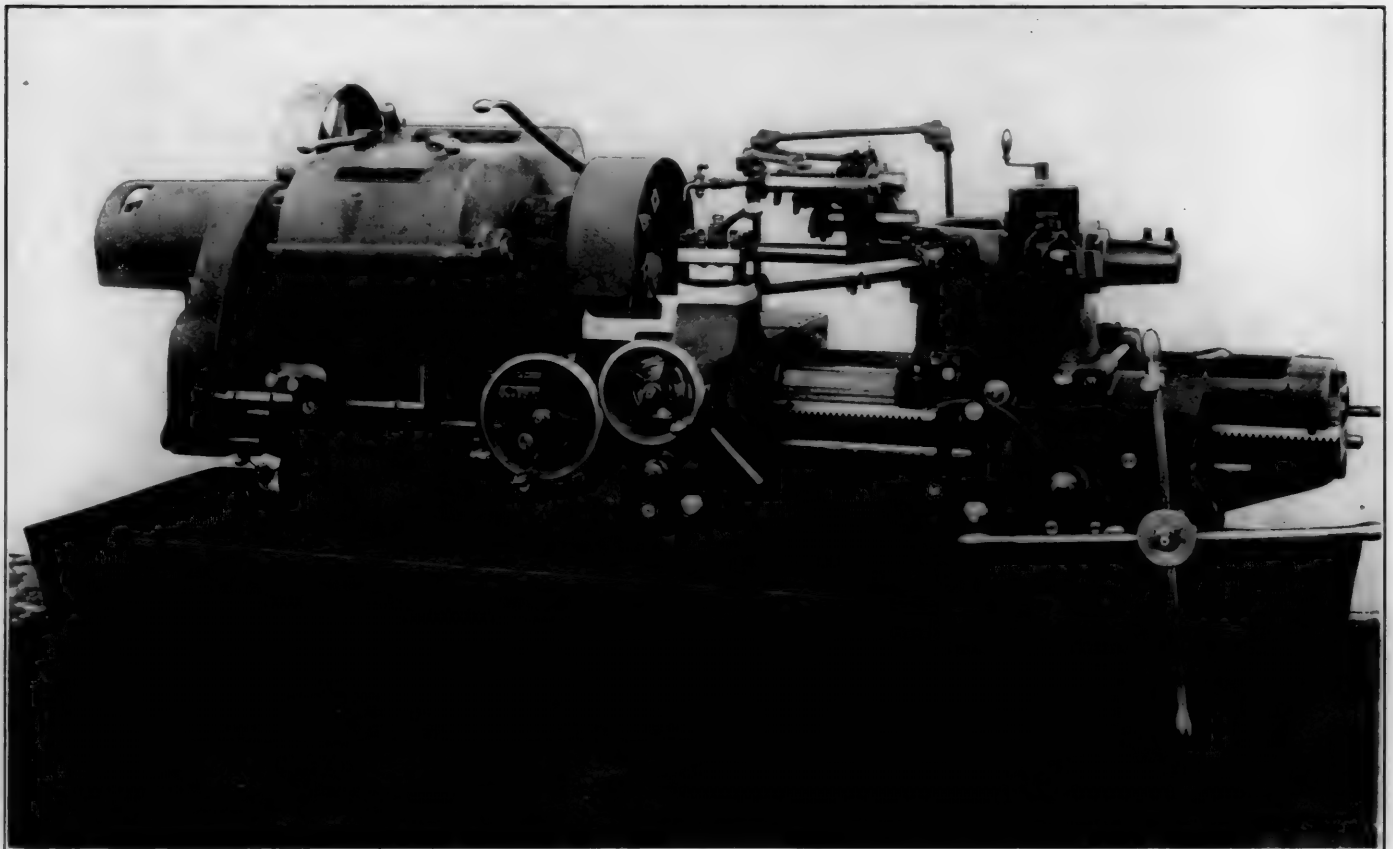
Foster 2-B Universal Turret Lathe with Chucking Equipment
